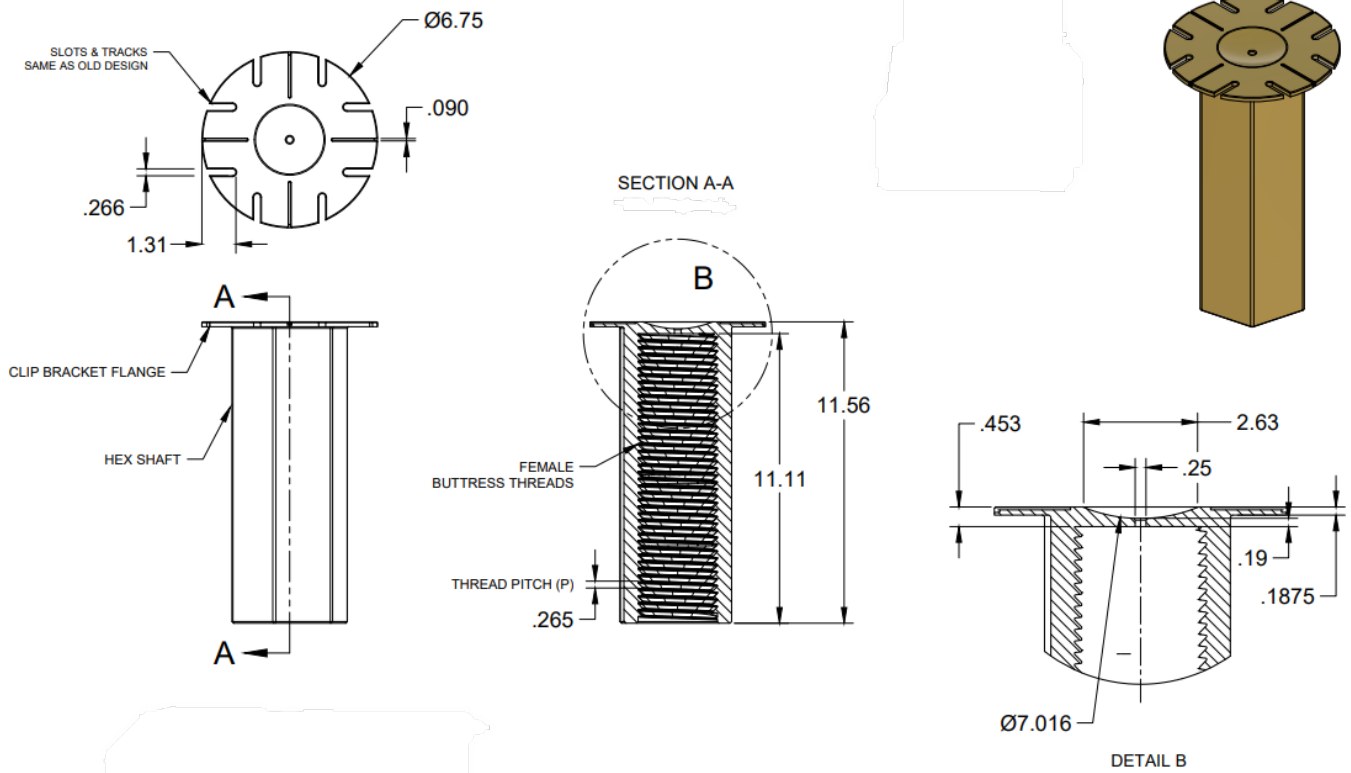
ALL-IN-1 EVERJACK HEX SHAFT EXTENDER COMPONENT
